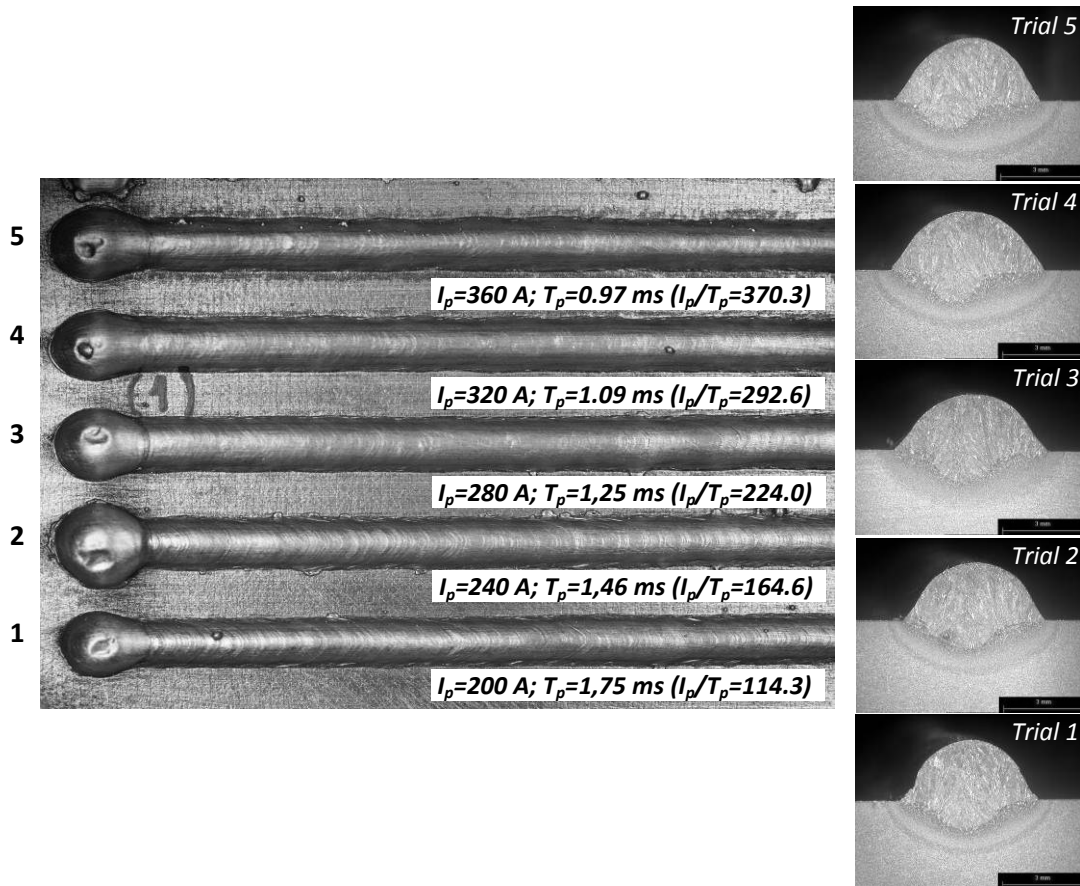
Weld bead top surfaces, transverse cross sections, and control parameters applied in study S_I .
